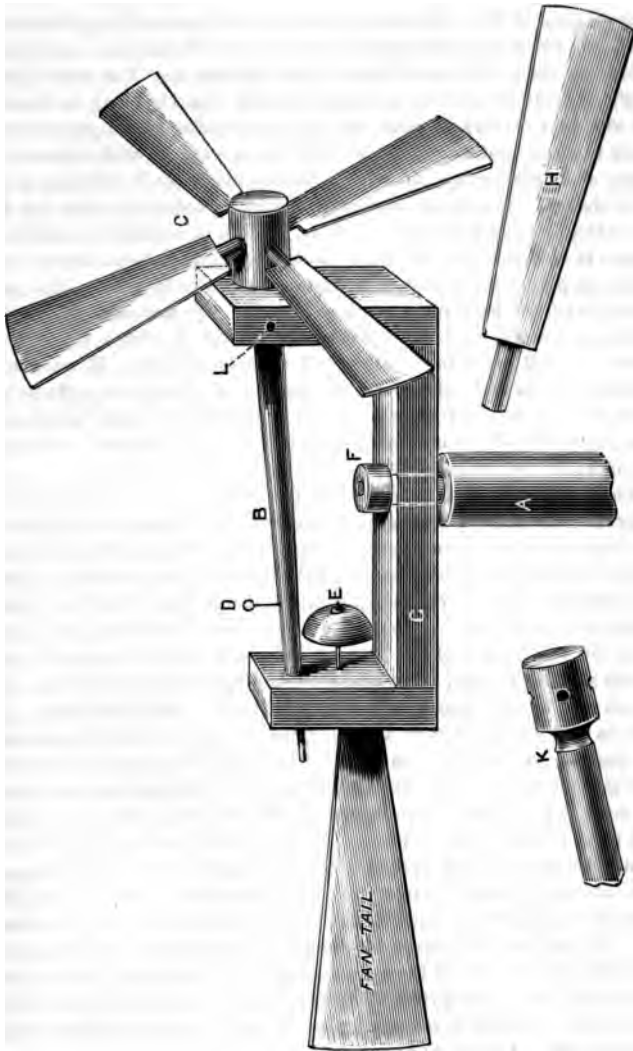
DETAIL OF TOY OR CLICK-GLACK WINDMILL.
